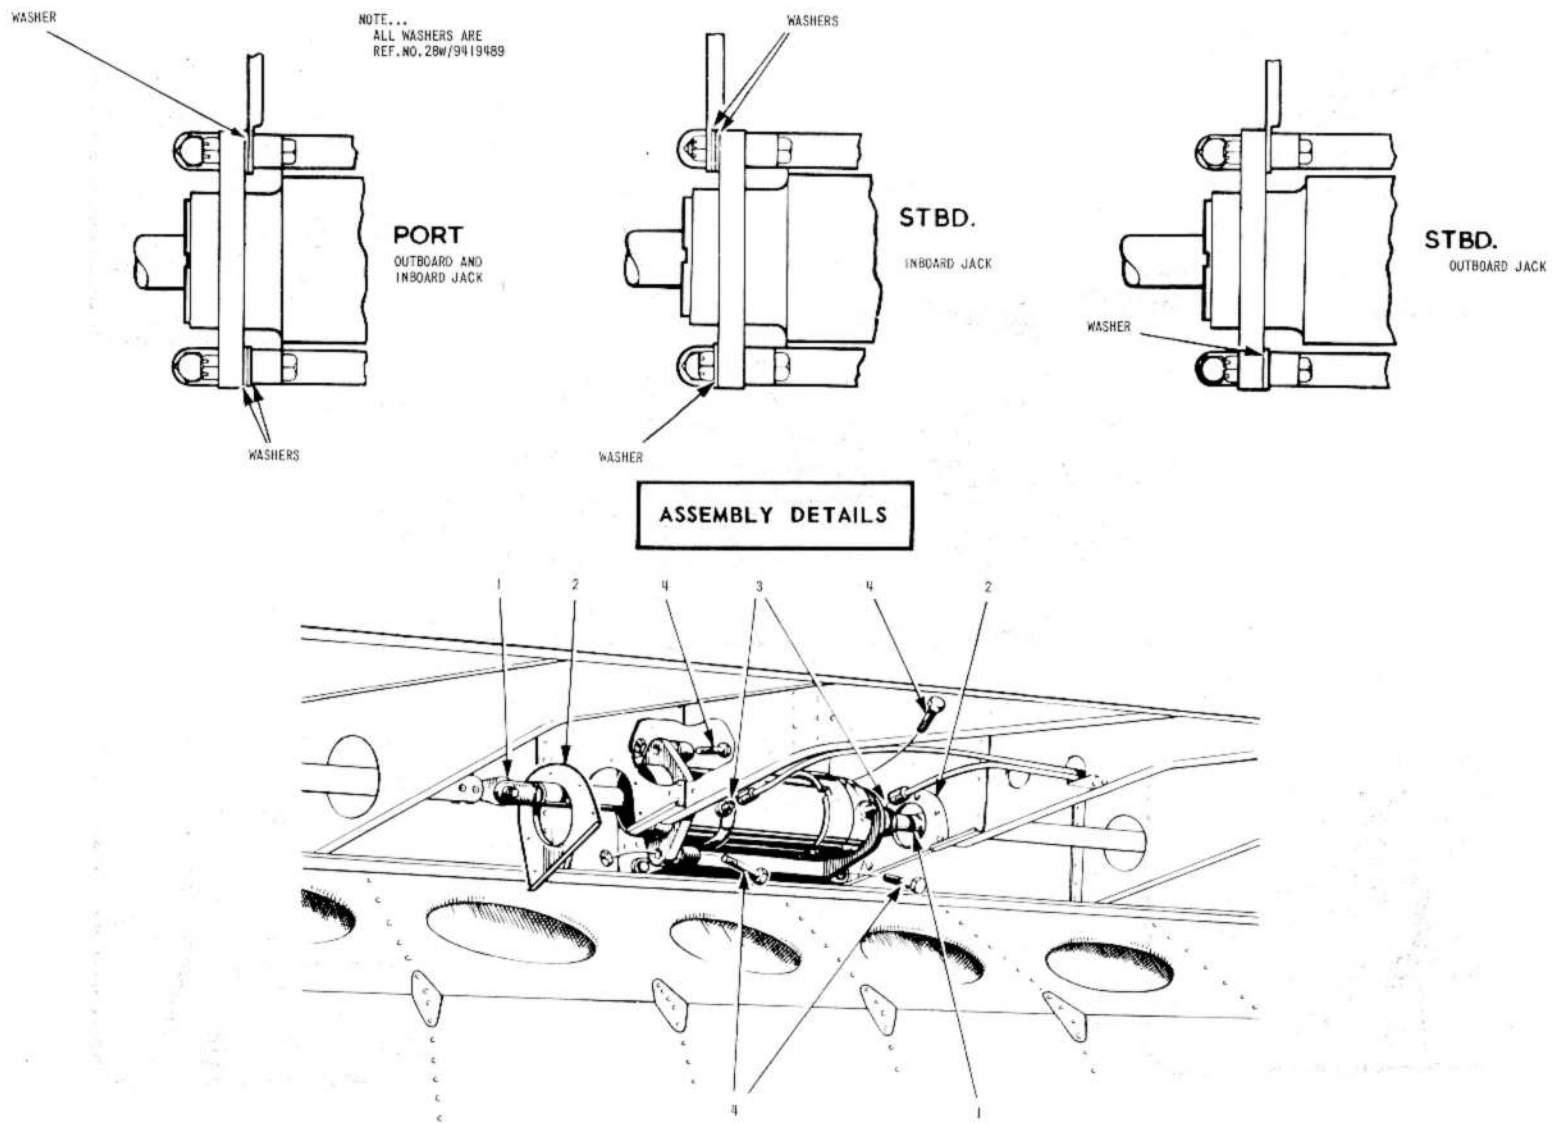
FLAP JACK - REMOVAL AND ASSEMBLY
